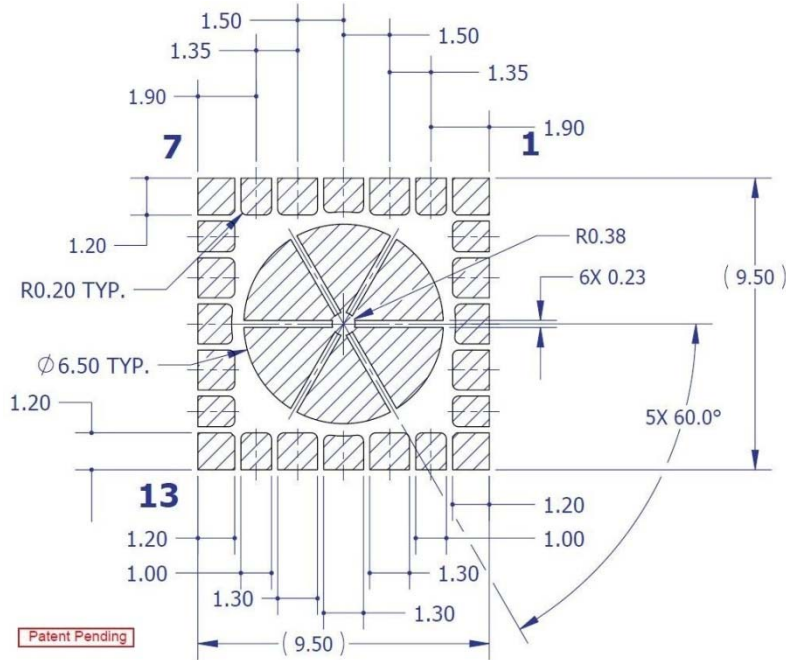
Recommended solder pad layout for anode, cathode, and thermal pad.
